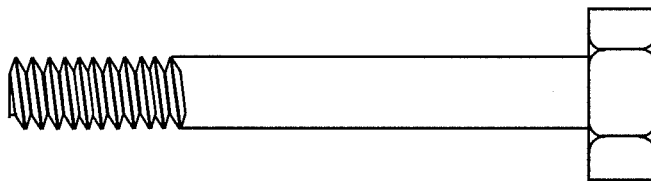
Typical Cast-in-Place Anchor (A325 Bolt)
